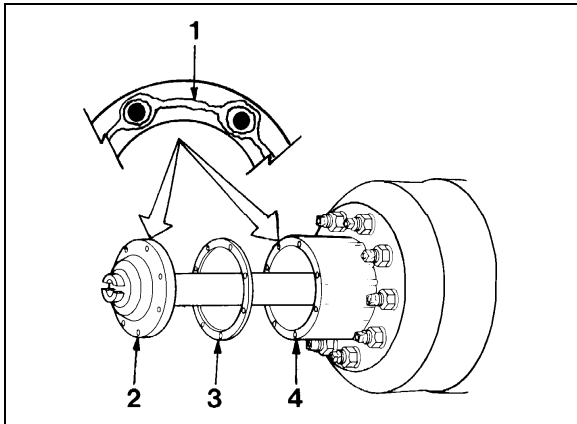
AXLE SHAFT INSTALLATION 11003
